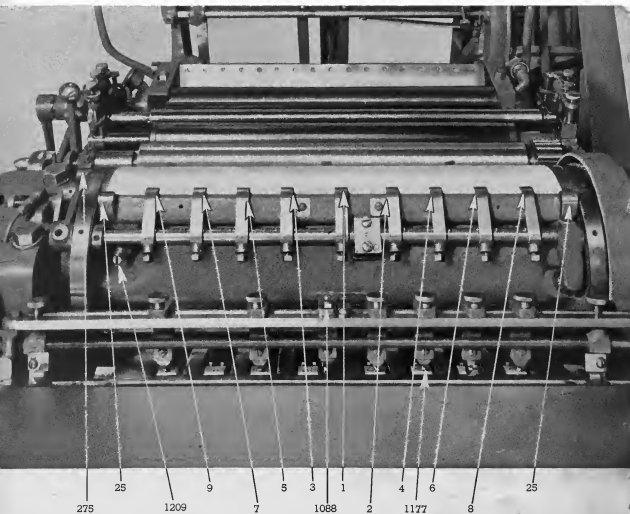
Top View of Press Showing Cylinder Grippers and Lower Edge of Feed Table
